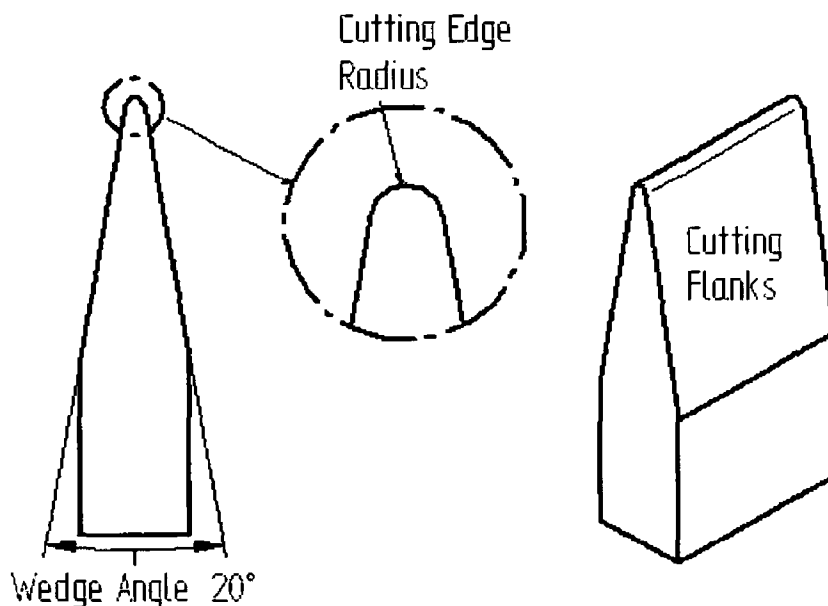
Cutting edge parameters showing wedge angle and cutting edge radius (Reilly et al 2004a)
